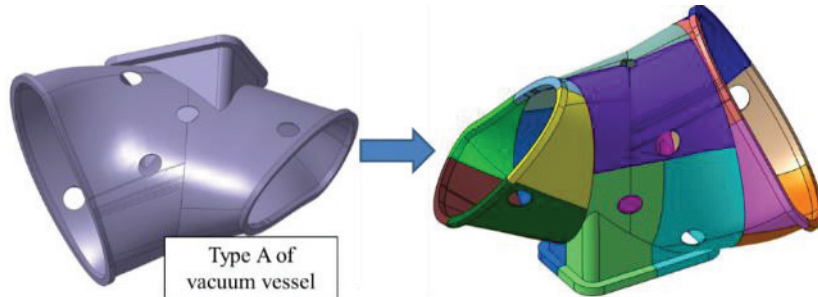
Type A of vacuum vessel is cut into 16 pieces to print by 3D printer.
